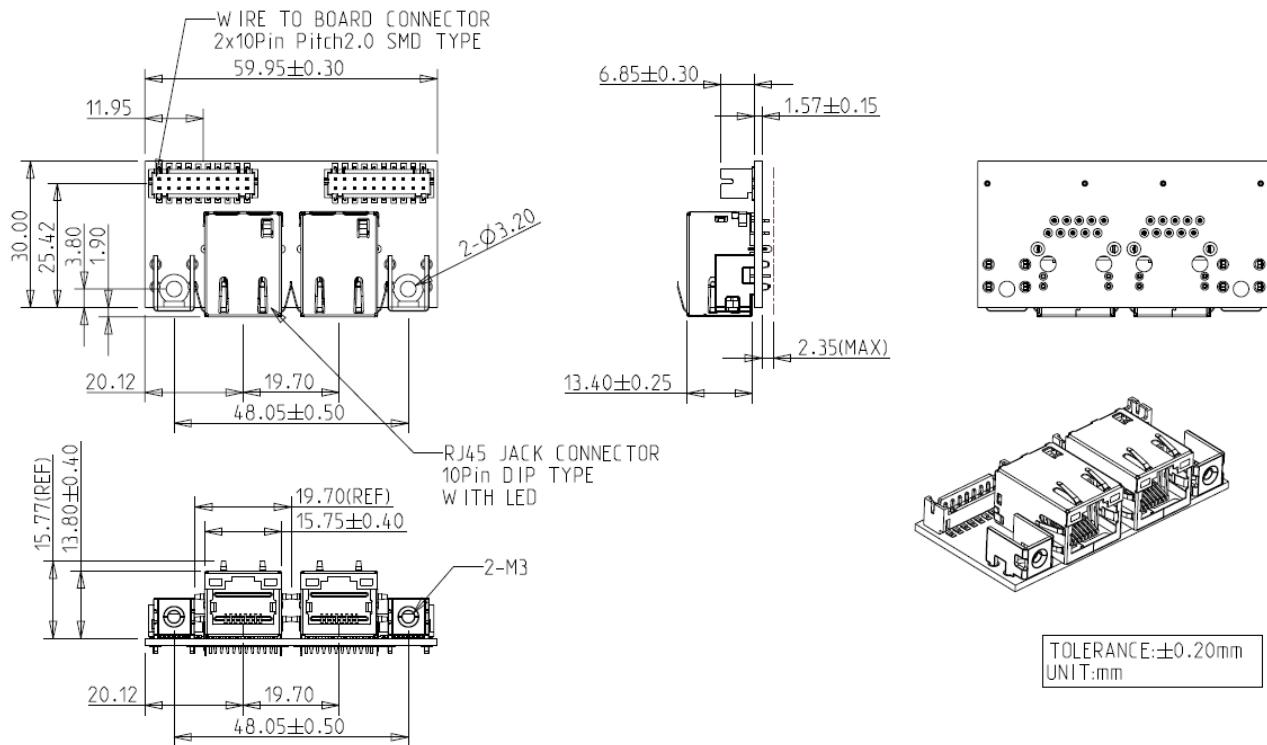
Mounting Hole Daughter Board Drawing (EGPL-G201-C1/W1)
